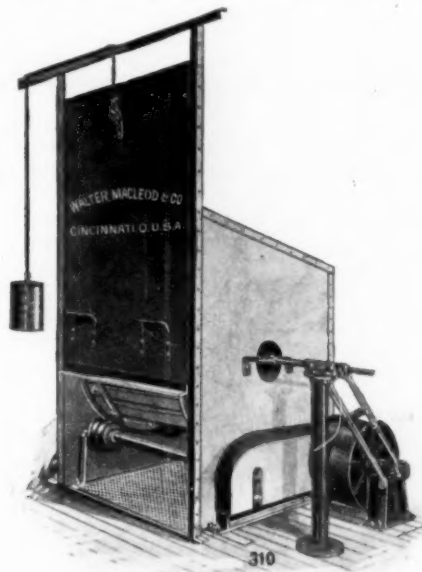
BUCKEYE SAND BLAST TUMBLING BARREL.
